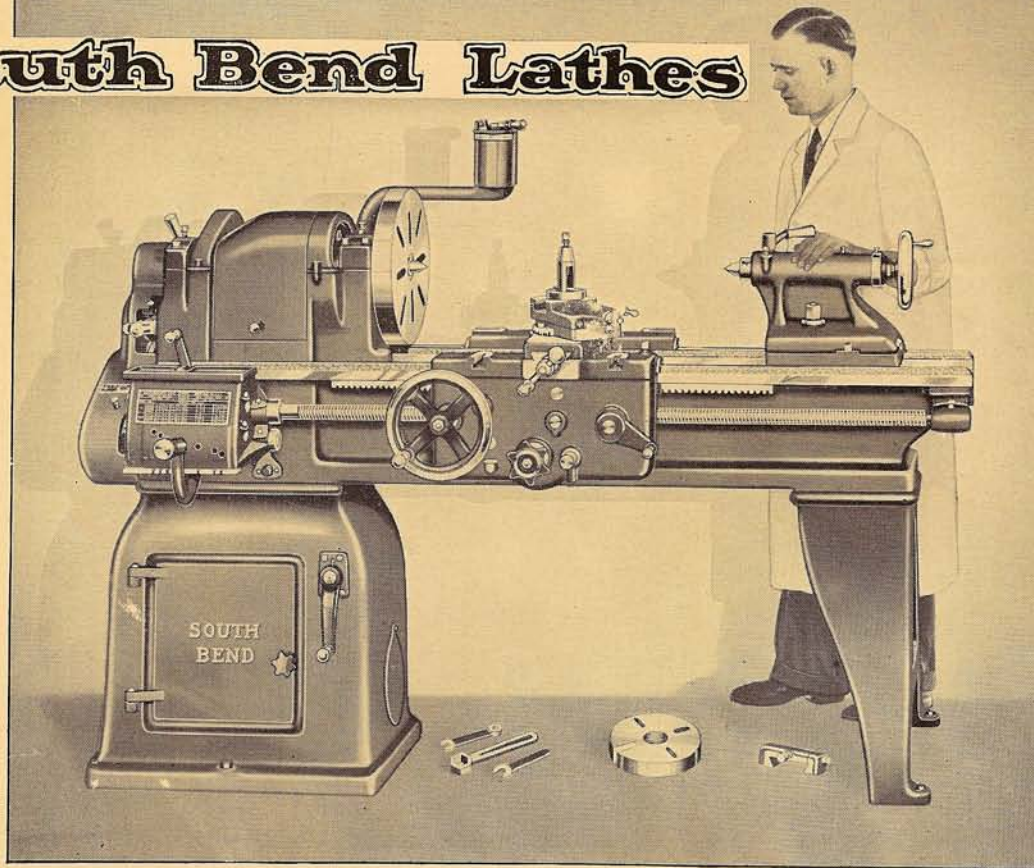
Cat. No. 117-C, 16" x 6' Quick Change Gear Underneath Belt Motor Driven South Bend Precision Lathe.....\$969.00
